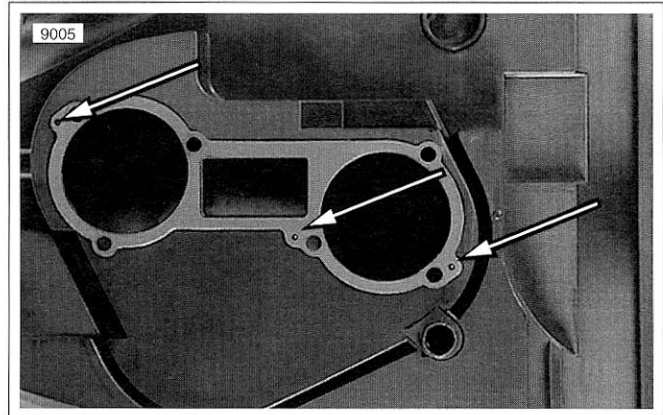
Air Filter Gasket Alignment Pins (3)
